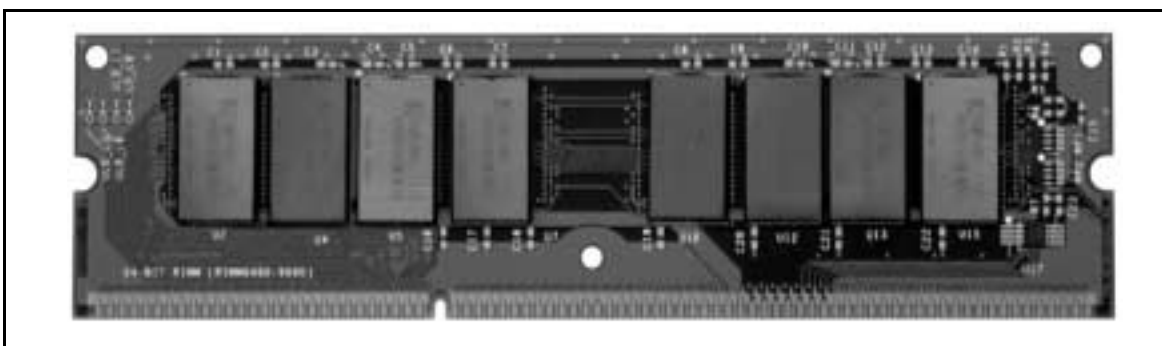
PCB Layout w/64 bit RIMM Modules
